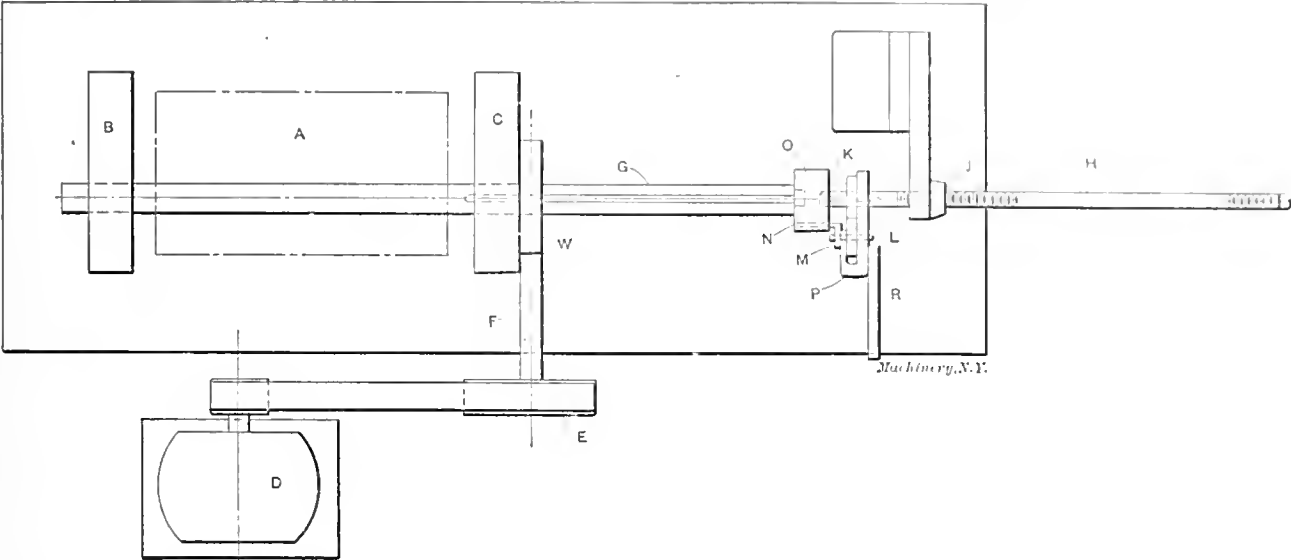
Diagrammatical Outline of Arrangement of the Drive and Feed of the Boring-bar of Jig in Fig. 133.
